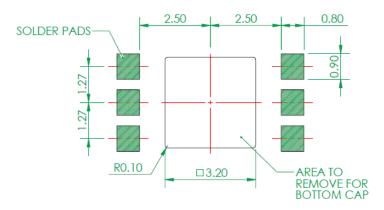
Pin configuration and package outlines, recommended PCB footprint
